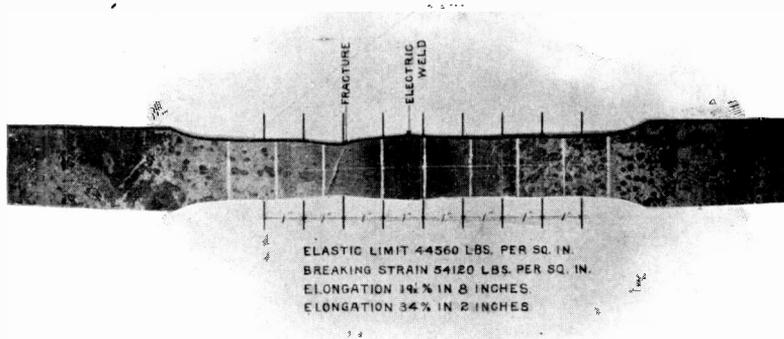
Typical Electric-Welded Test Bar.
